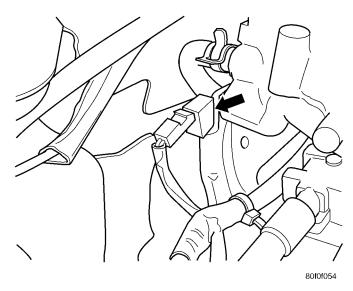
COIL CAPACITOR - 2.4L TURBO
